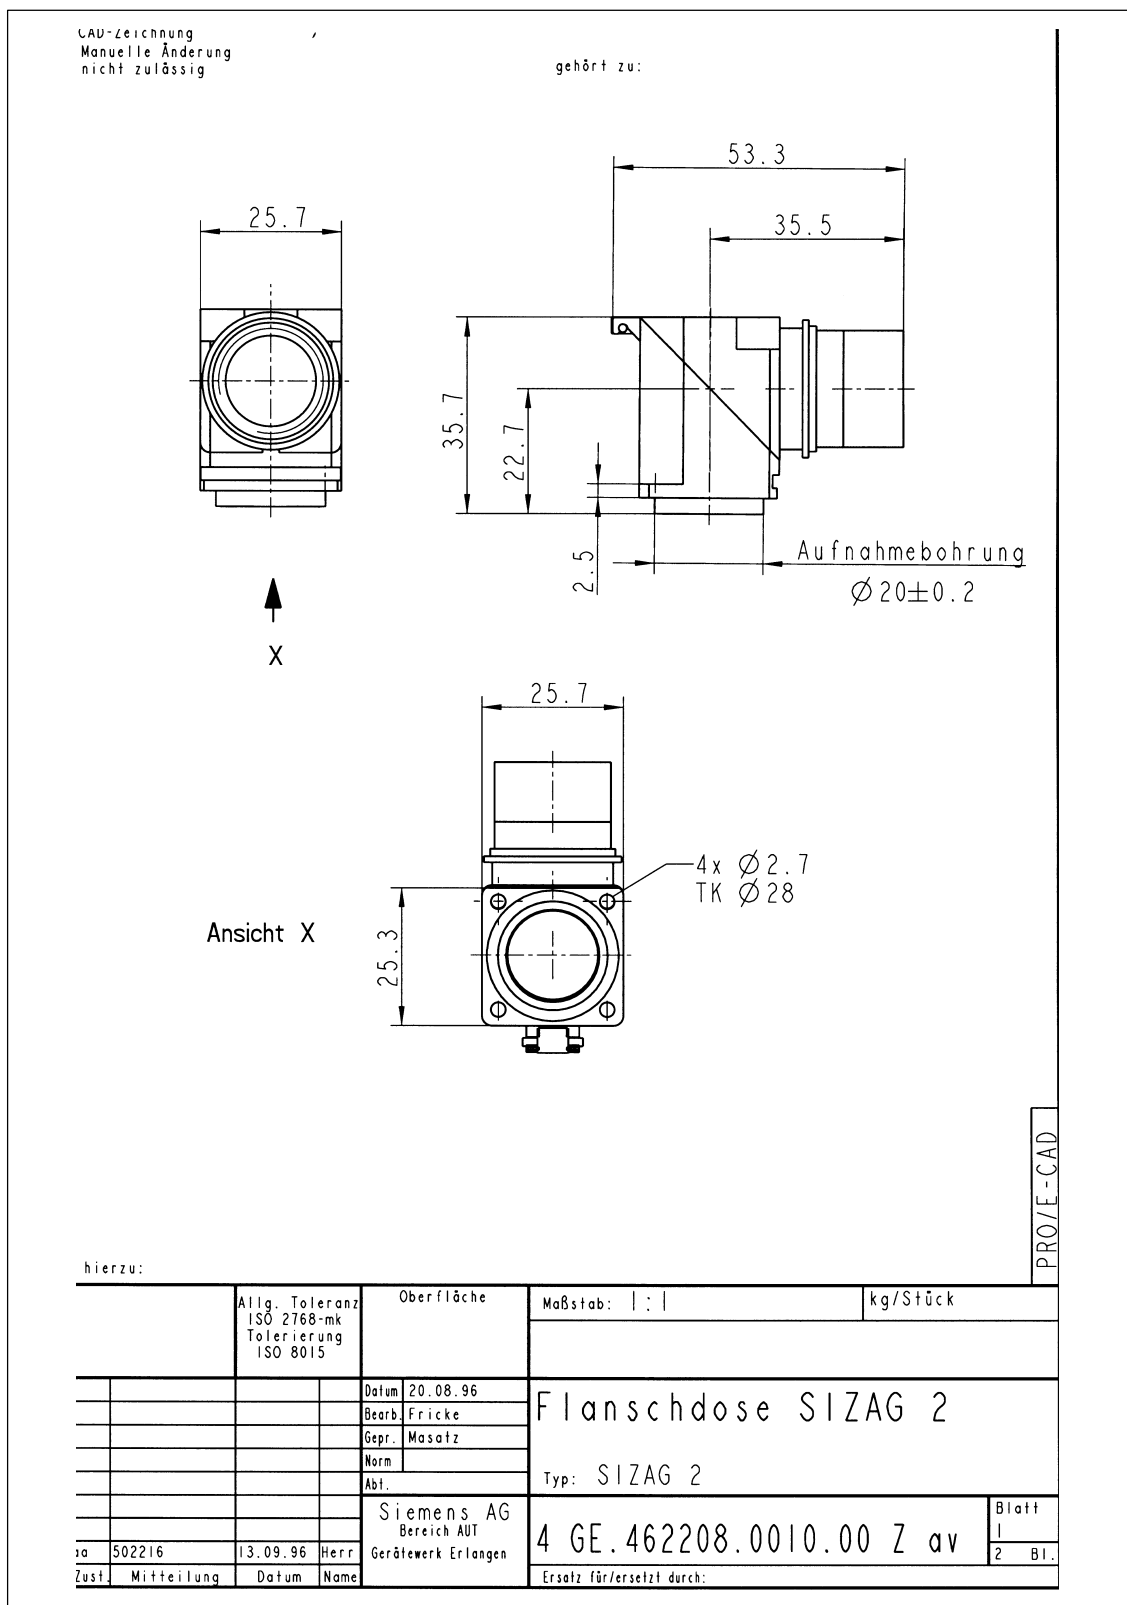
Mounting drawing, toothed-wheel encoder SIZAG 2
